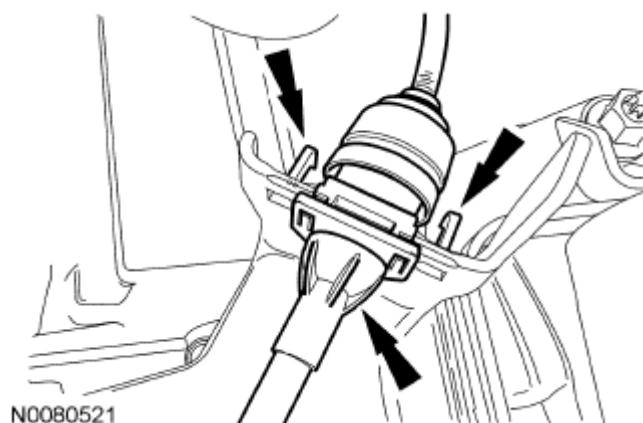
Locating Transmission Shift Cable Tabs And Bracket
